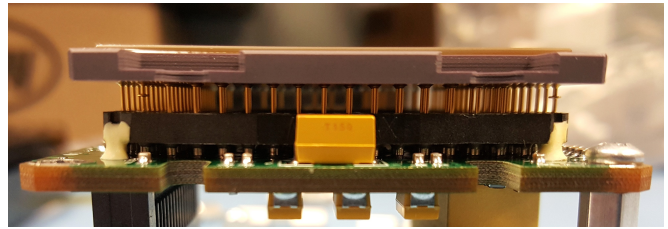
Side view of Sensor board, showing surface-mount BGA socket with detector
